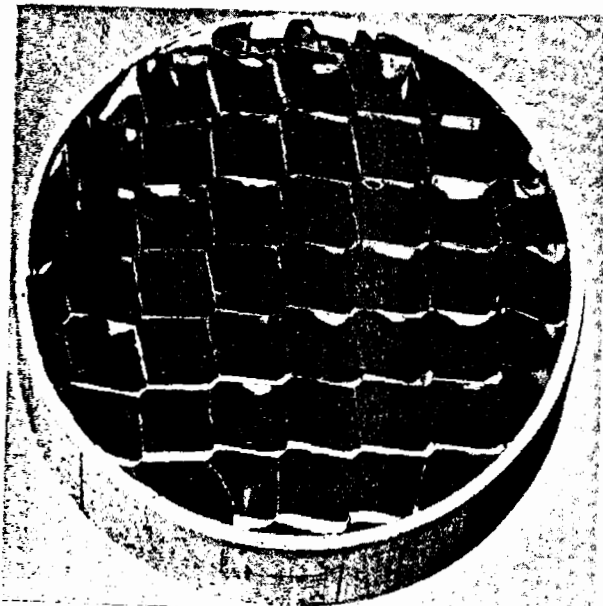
Honeycomb fuel assembly model using 0.25 mil stainless steel foil
